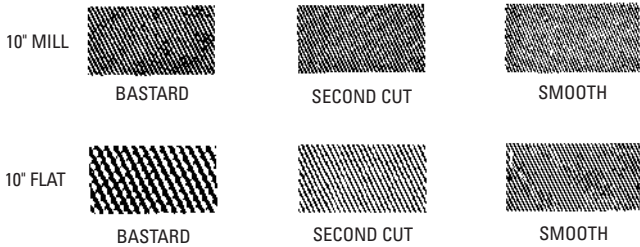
Standard file tooth cuts. (Courtesy Simonds Saw & Steel Company.)
